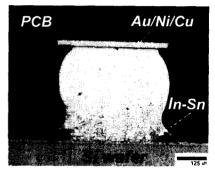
Cross-sectional optical microscopy of Sn-Ag-Cu/In-Sn solder joint after aging at room temperature for 76 days.
